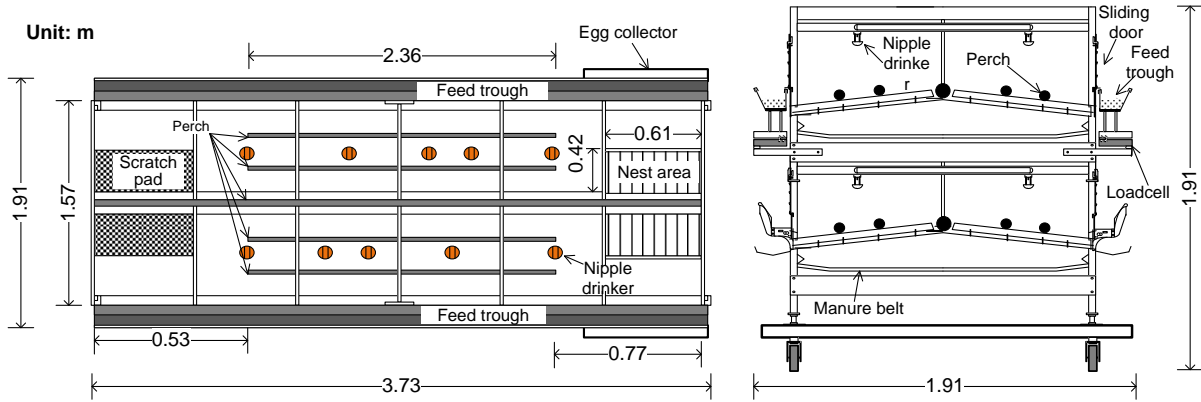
Top view (left) and side view (right) schematic drawings of the enriched colony housing (ECH) module.
